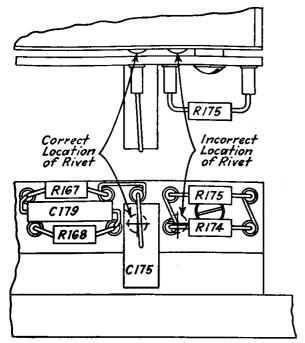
Protection for resistor mounting strip in AN/ARC-1 equipments.
